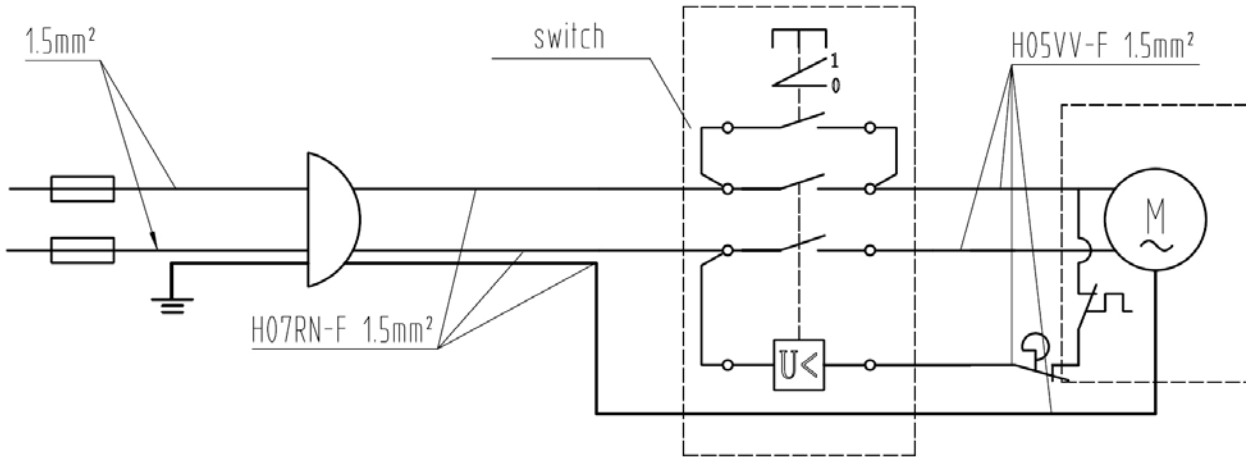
Spare parts drawing 4 - Spindle Moulder TF 170 E (230 V and 400 V)
